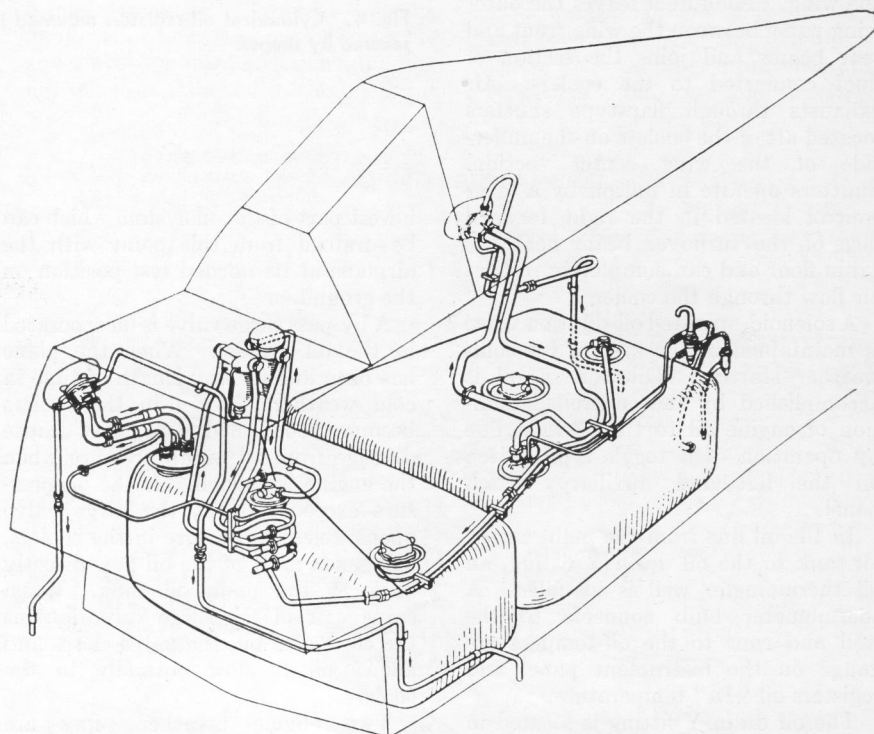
Complete fuel tank and line arrangement. Electric pumps are used in each tank, and electric measuring gauges are also employed. Filler openings are on the right side of the fuselage inside quickly detachable cover plates. The forward self-sealing tank holds 61.2 U.S. gal; the aft tank, 76.8 U.S. gal. The tanks are separated by the rear spar tie-through member.
